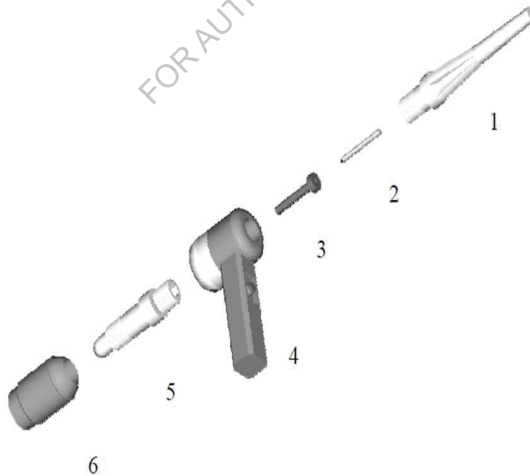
Exploded View of a Torch: Back cap-1 Electrode -2 Collet- 3 Handle- 4 Collet body-5 Nozzle -6
